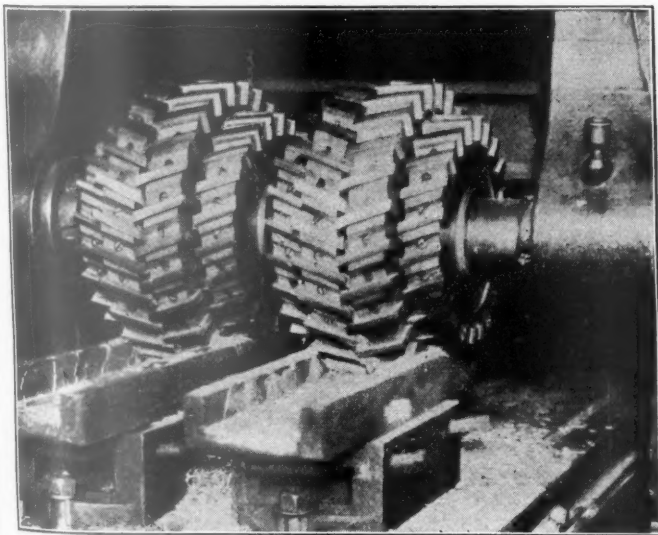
Milling the guide bar fit of crosshead shoes using a gang of inserted tooth interlocked arbor cutters
